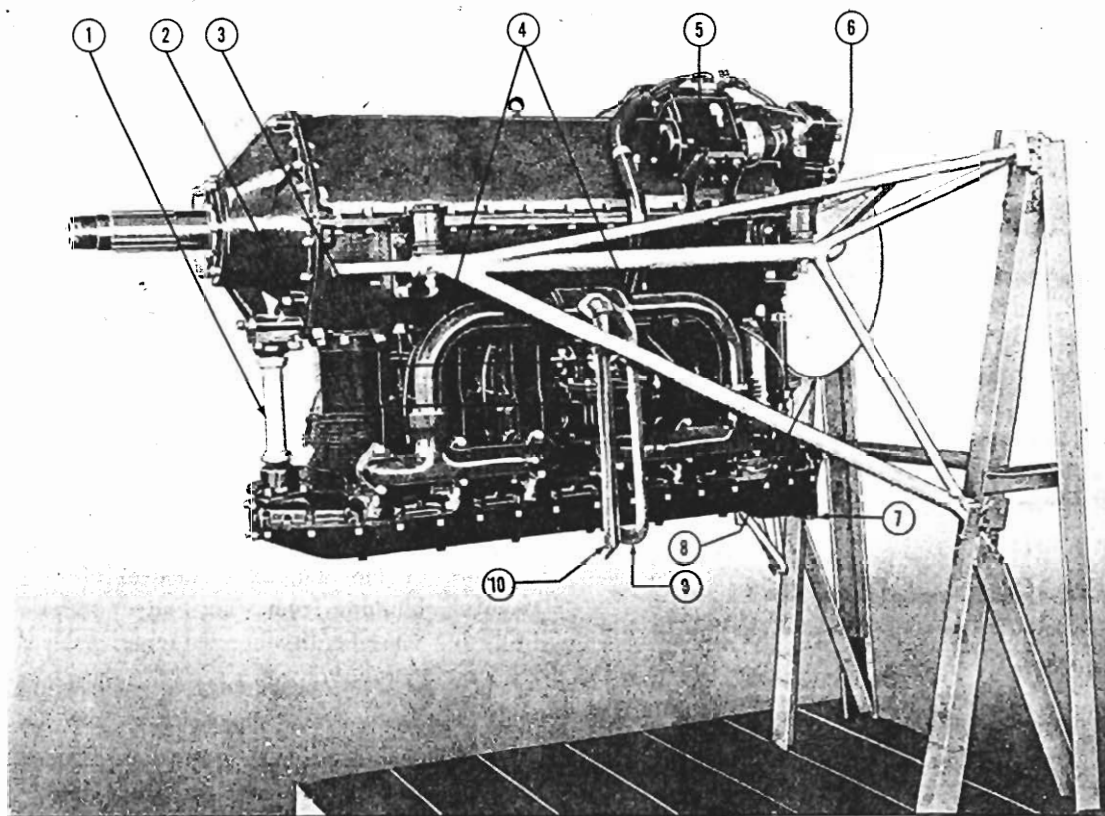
Ranger Engine—Left Side (2 of 2)
